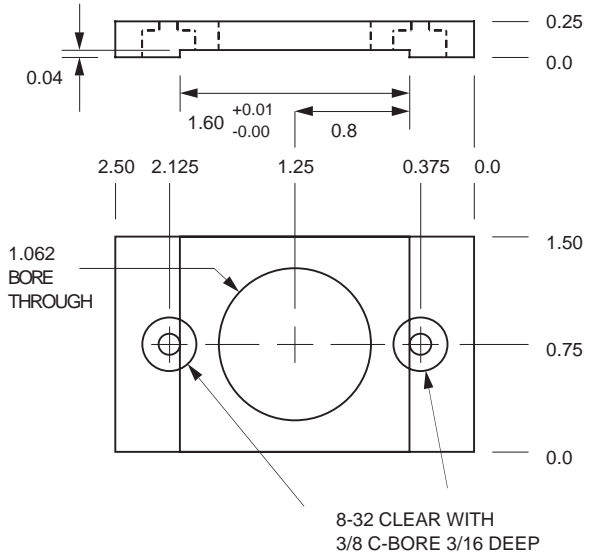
SPCM front adapter plate. Units: inches, all tolerances are ± 0.01 inch unless otherwise specified.
